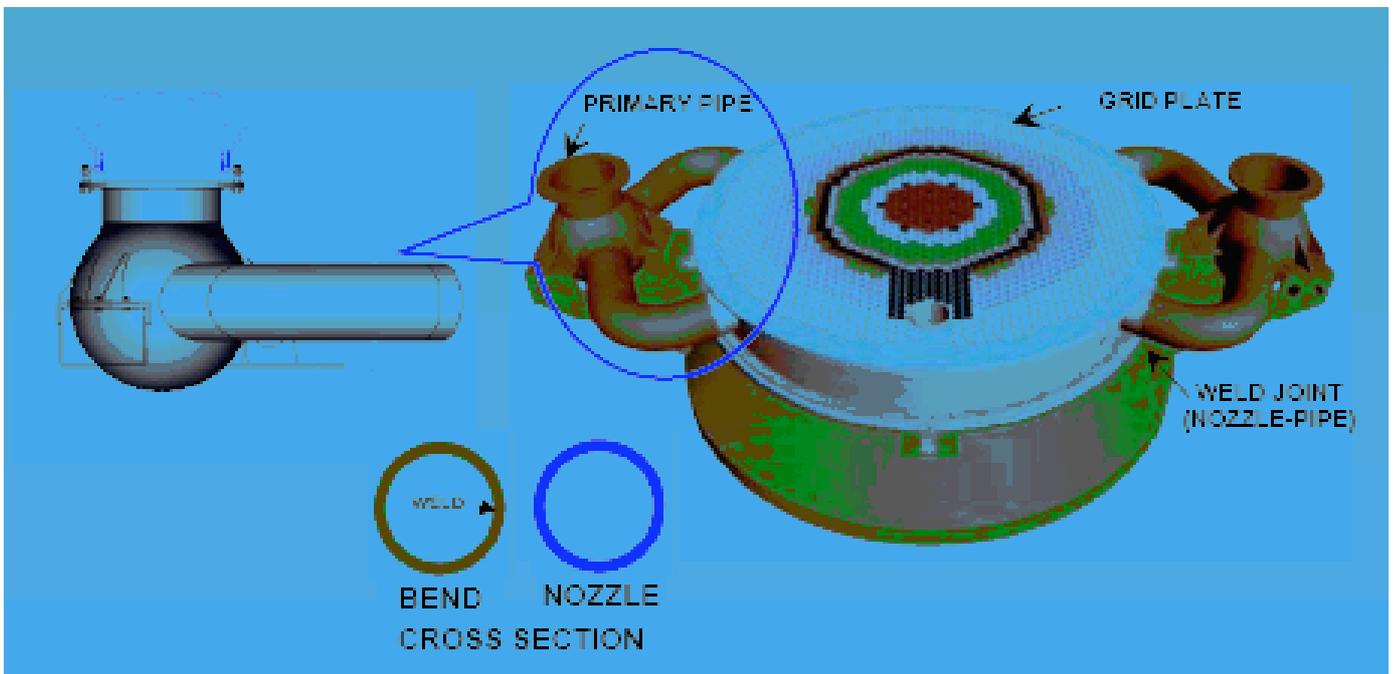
Grid plate nozzle and primary pipe weld
